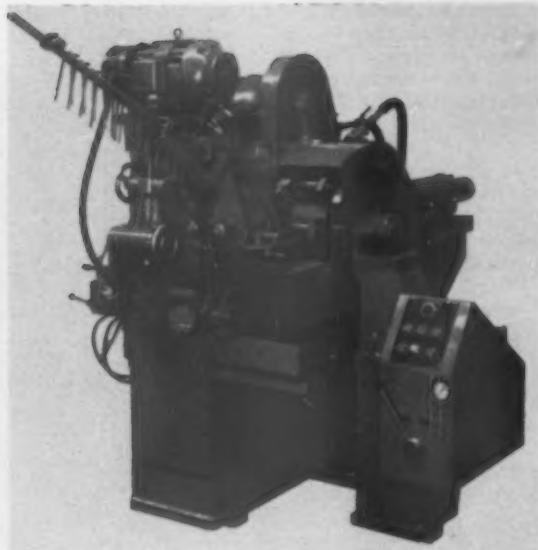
(Above). Rcwland special purpose surface grinder for valve stems
